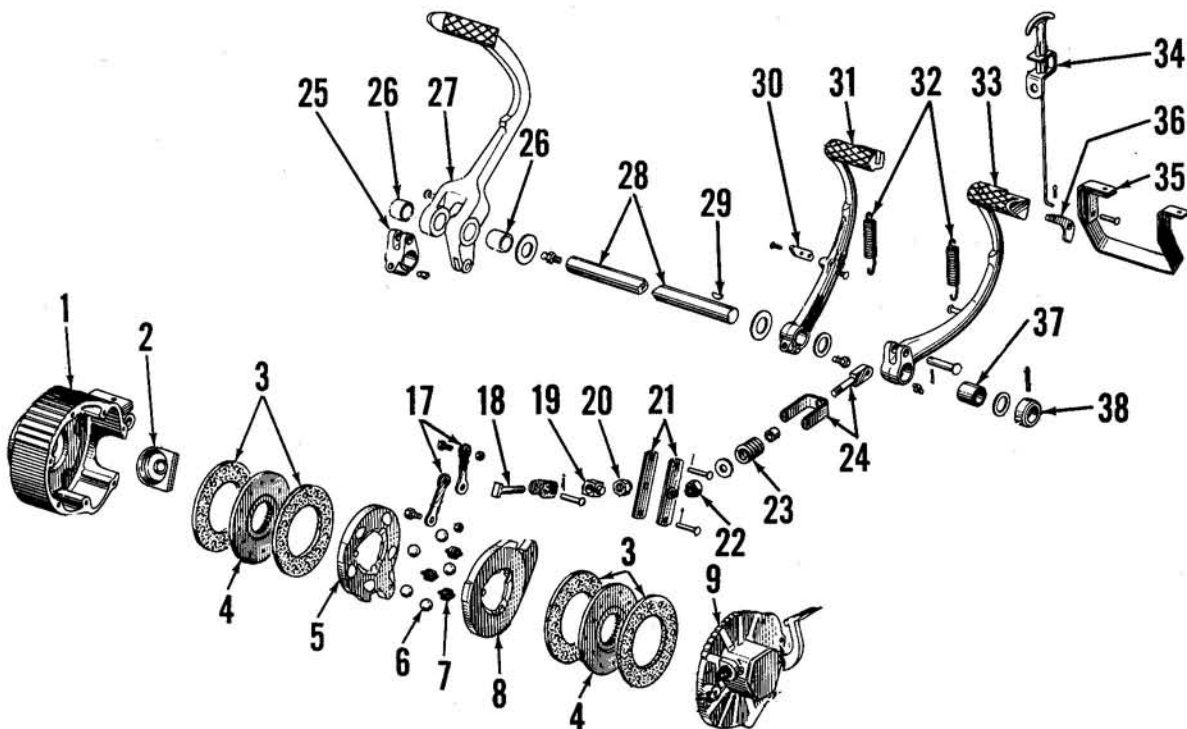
Exploded view of model "FSM" and "New FSM" right brake assembly and actuating pedals and linkage. Left brake assembly is similar except that cover (9) does not contain differential lock operating linkage. Refer also to Figs. 163, 164 and 165.
